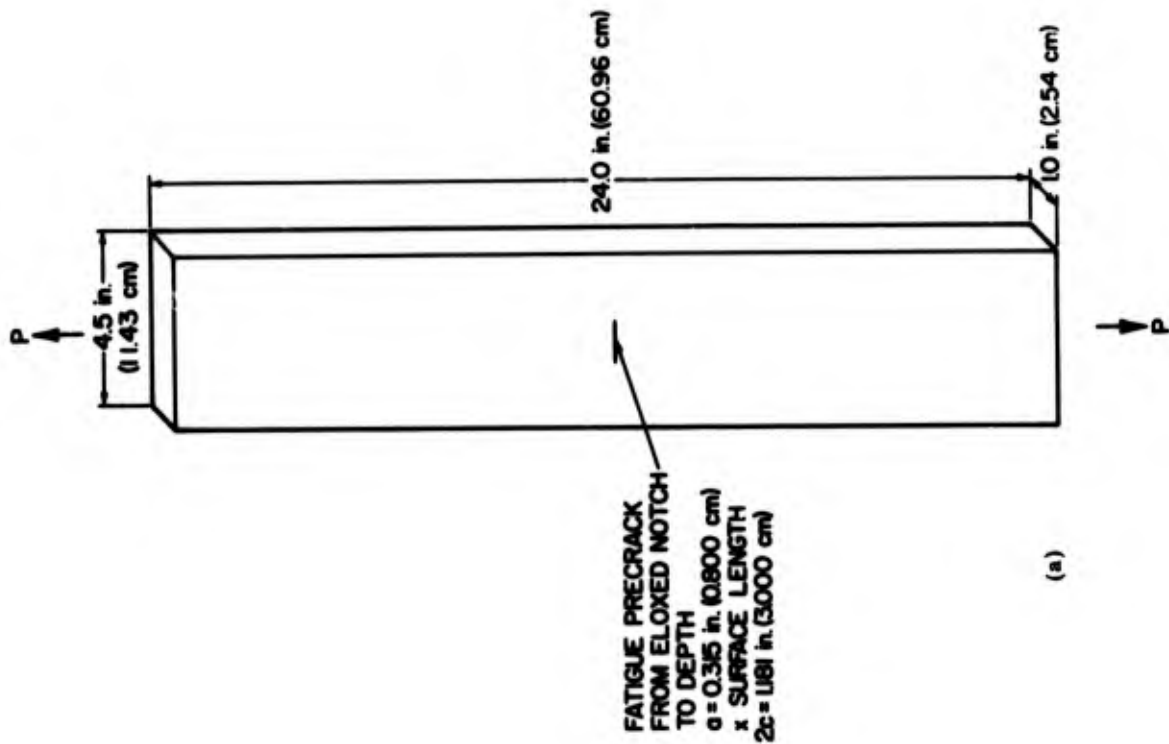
Specimen geometries: (a) part-through cracked (PTC) tension specimen,
